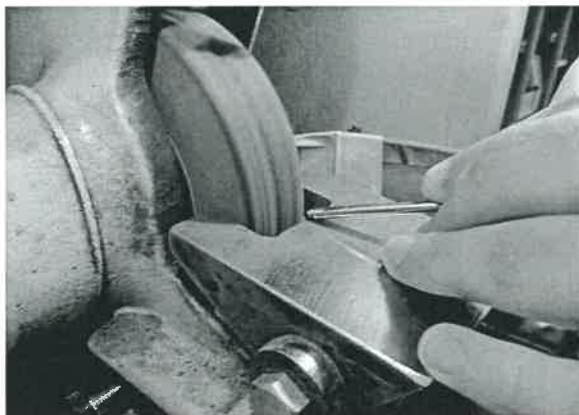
Buffing a setscrew removes a milligrams of weight during final balancing.
